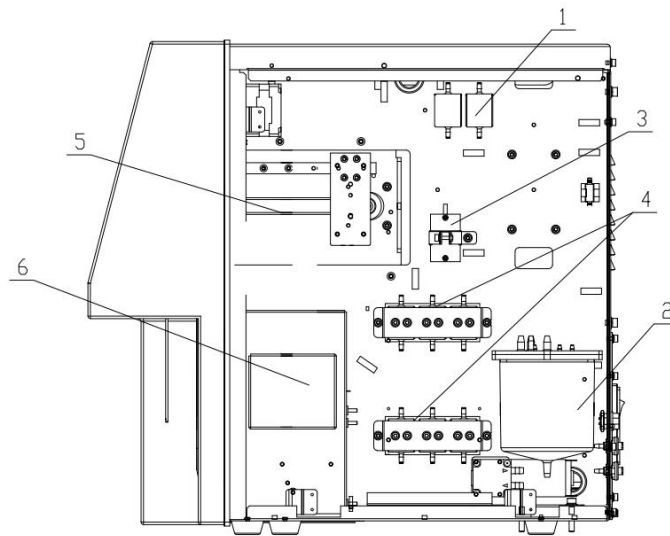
Right view of the analyzer (removing the right side sheet metal)
